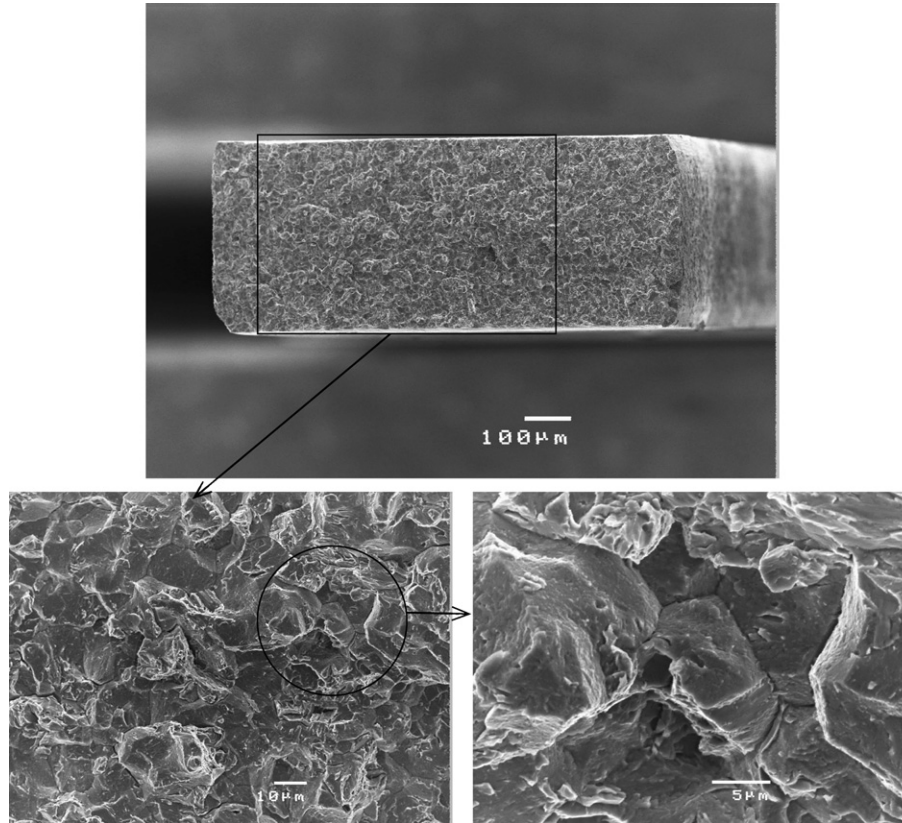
SEM micrographs showing the fracture surface of T91 specimen F16 irradiated to 19.6 dpa and tested at 350 °C.
